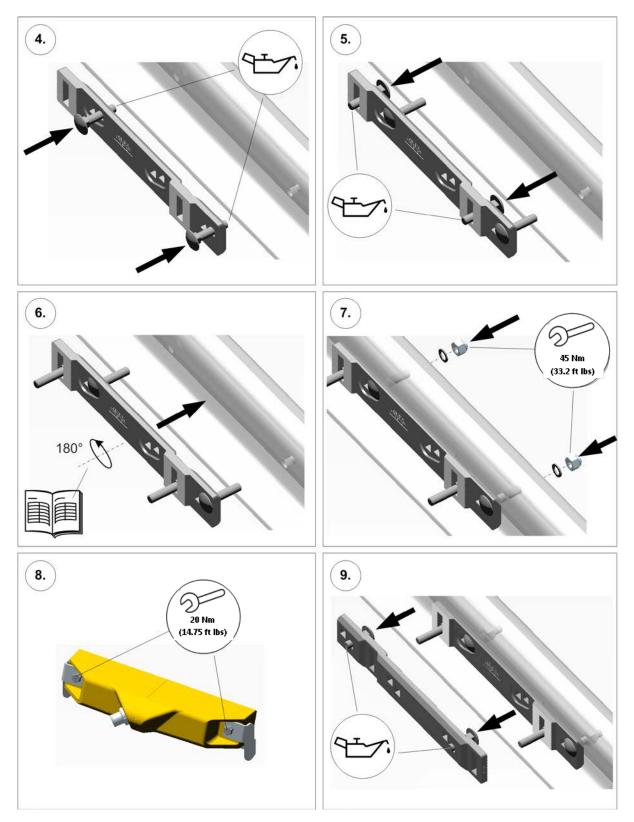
Attaching Bolts to Outer Wheel Detector (Part 1)
